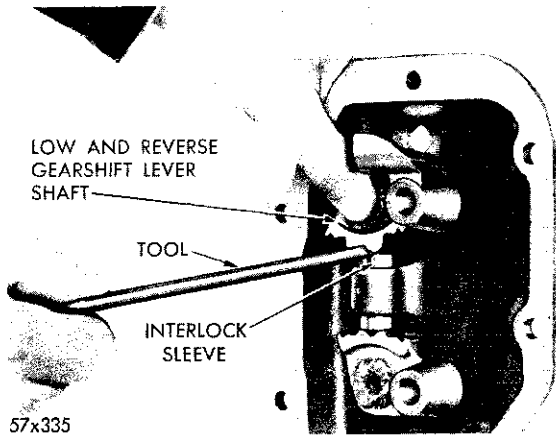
Engaging Low and Reverse Gearshift Lever Shaft Ball with Interlock
